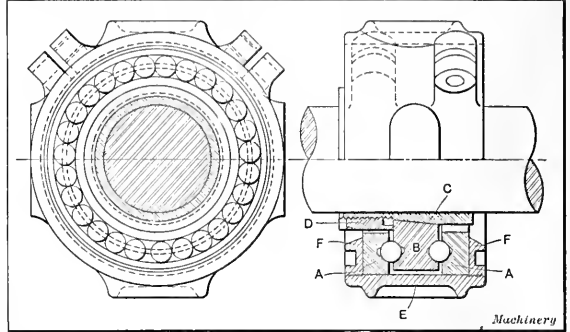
End and Cross-sectional Views of Suspension Ball Bearing
